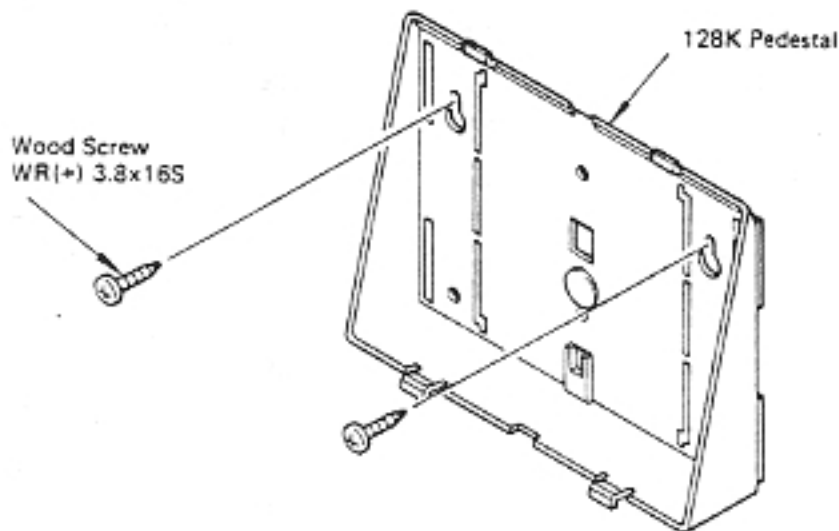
(4)(a) Mounting 128K Pedestal on Wall
